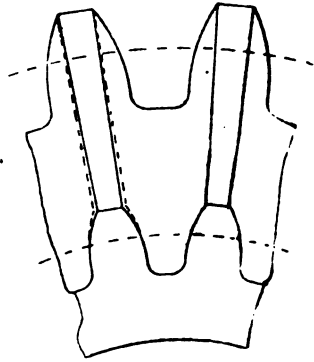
Effect of Cutting Bevel Gear Teeth with a Rotary Cutter.
